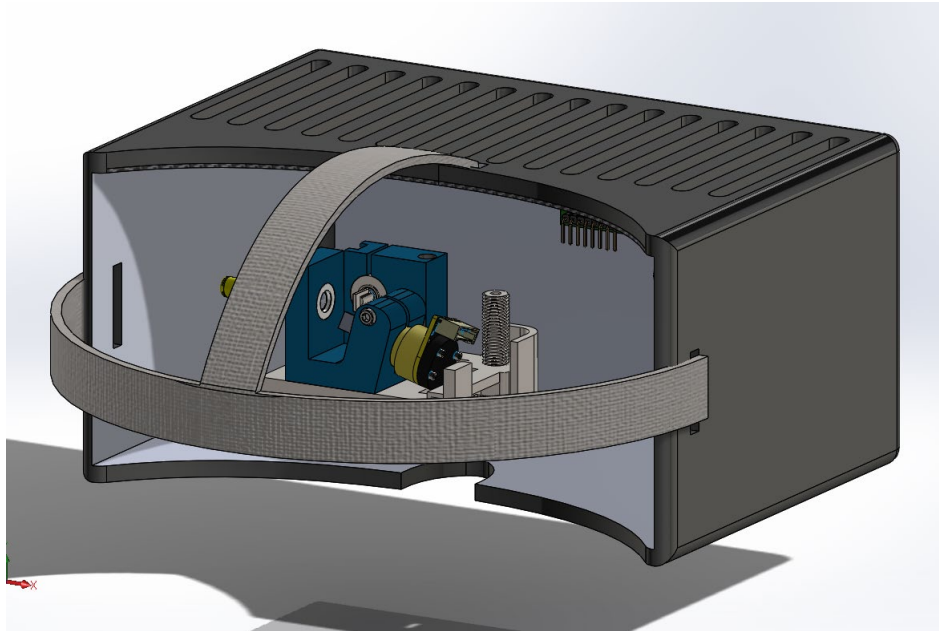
SolidWorks Rendering of Prototype Assembly (back view at galvanometer)
